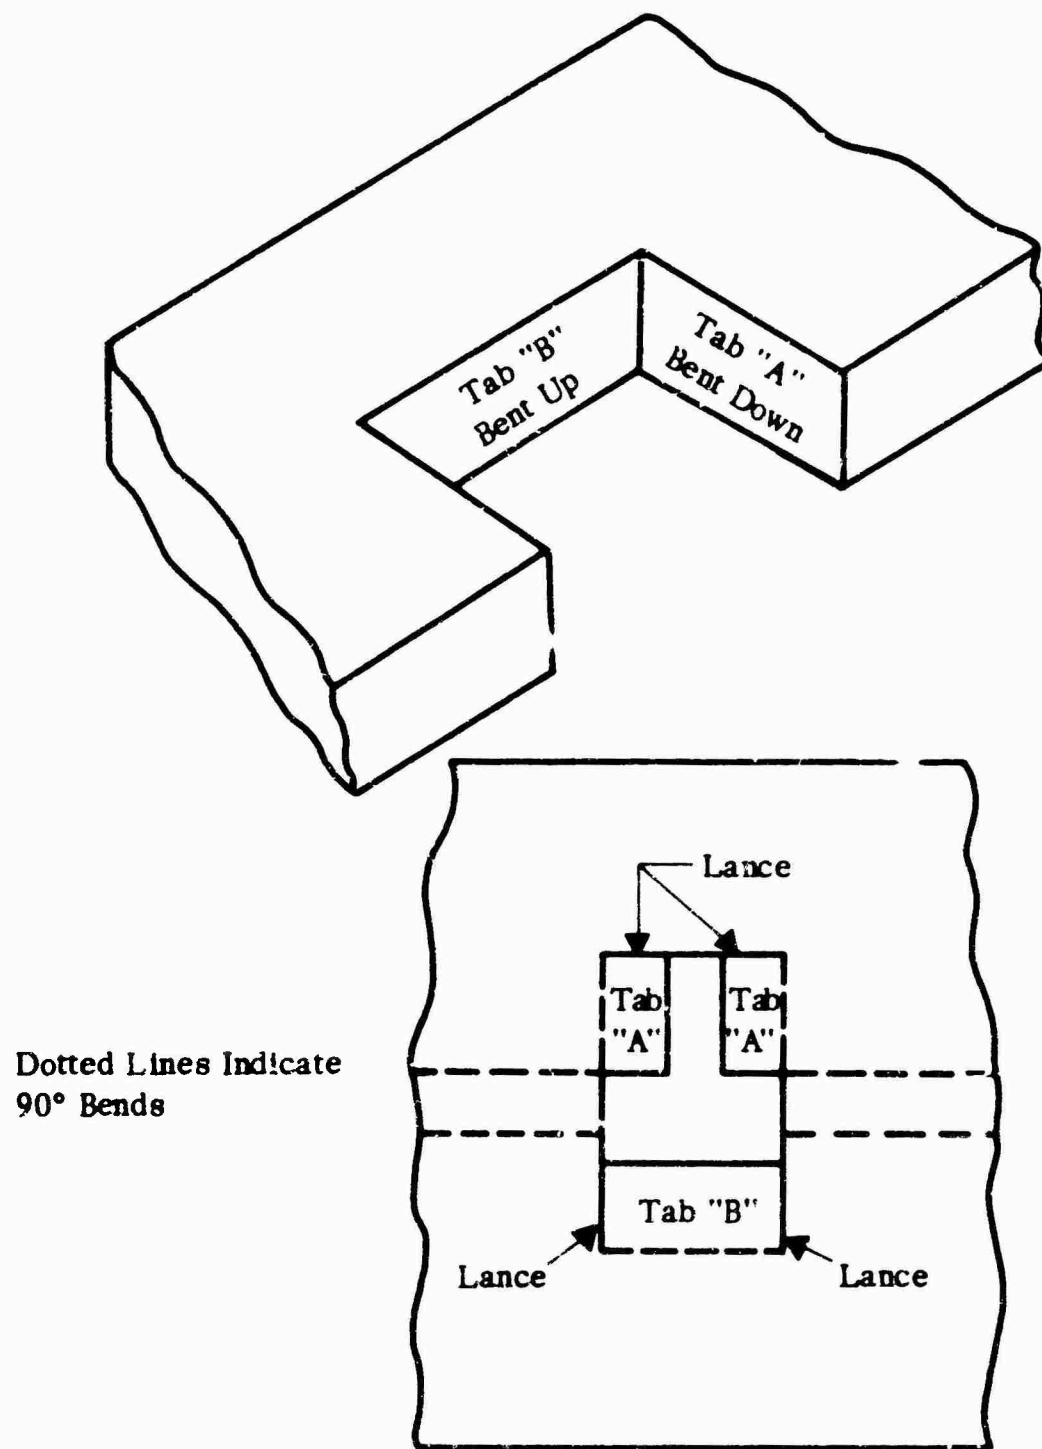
CONCEPT FOR FABRICATED STEEL
